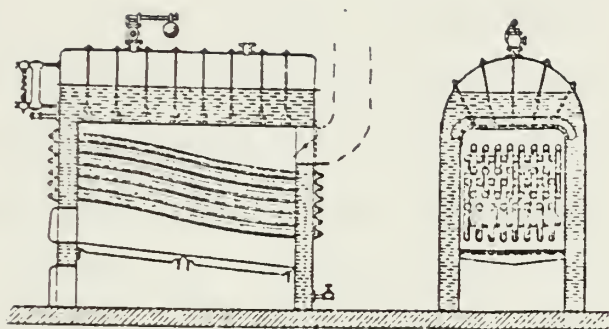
STEPHEN WILCOX'S BOILER WITH INCLINED TUBES - 1856
